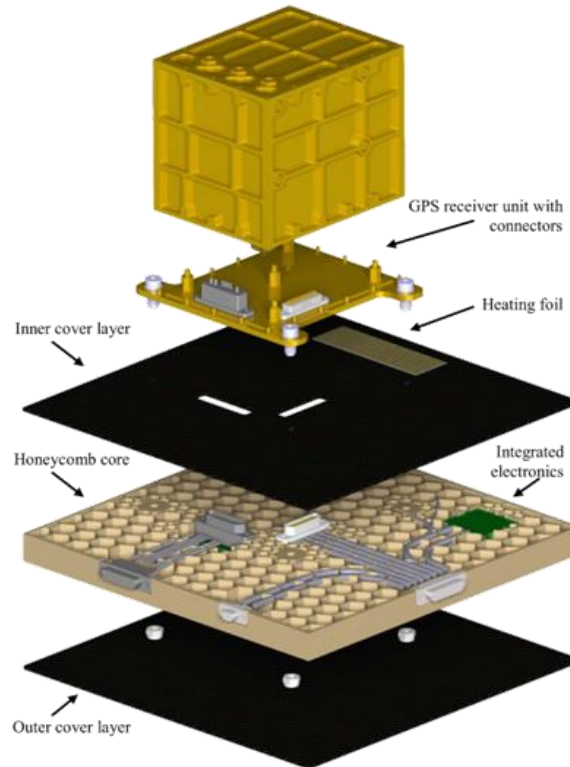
Exploded view of the technology demonstrator with the GPS receiver unit. Courtesy of S. Hümbert, DLR-BT [REF\_DLR]
